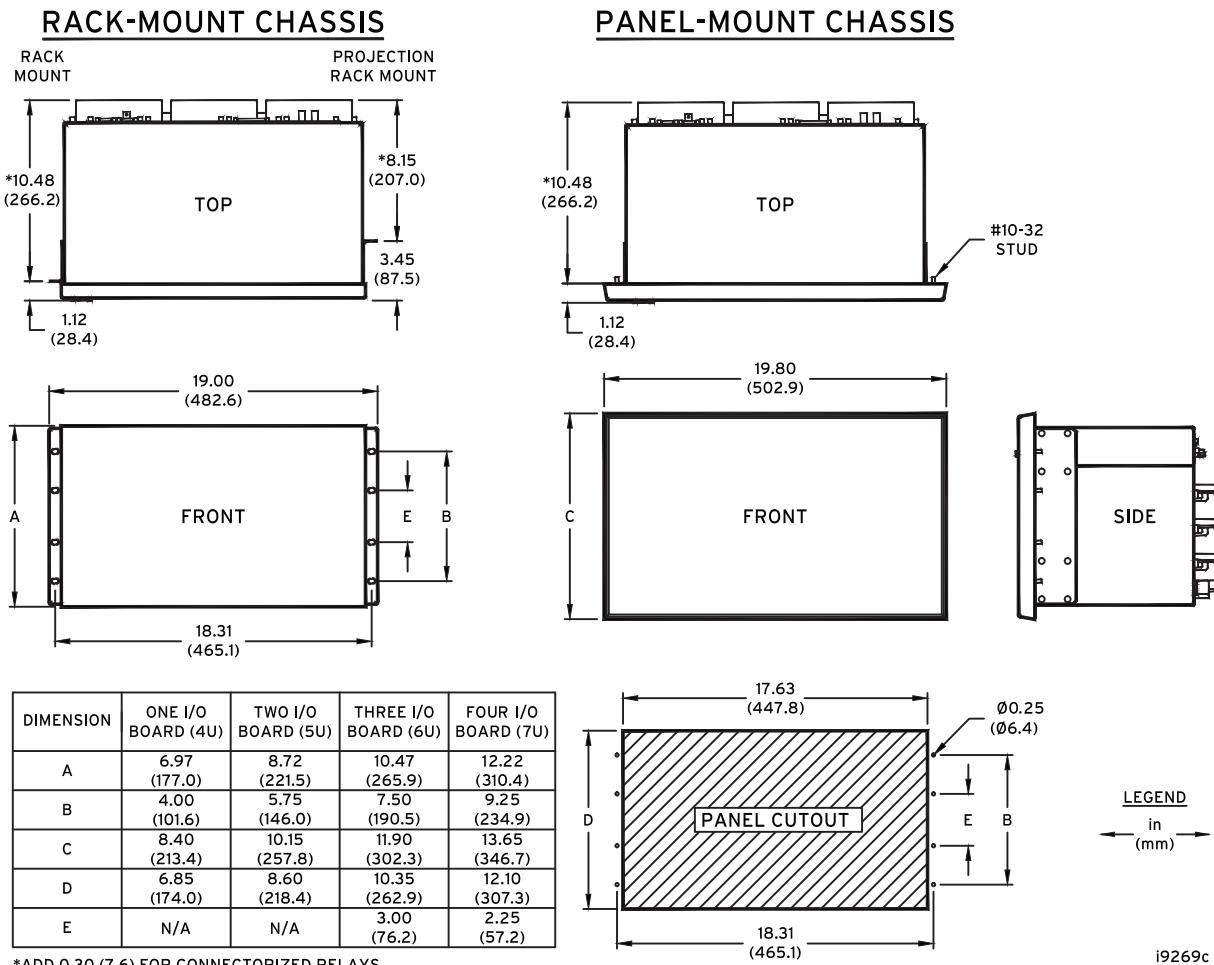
4U, 5U, 6U, and 7U Chassis Dimensions
